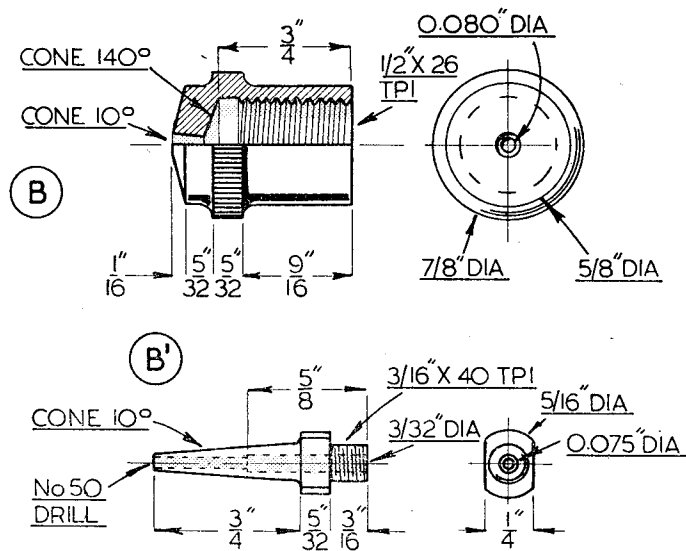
B and 7B¹. Details of combining cone and air nozzle
